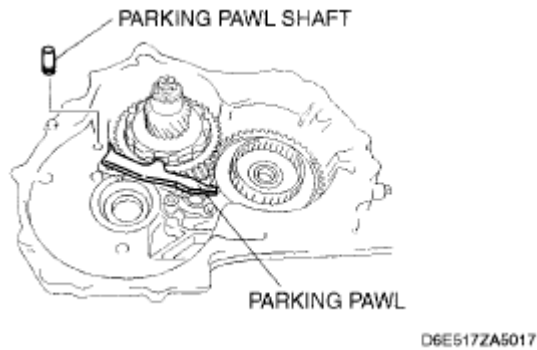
View Of Packing Pawl, Parking Pawl Shaft And Transaxle Case
